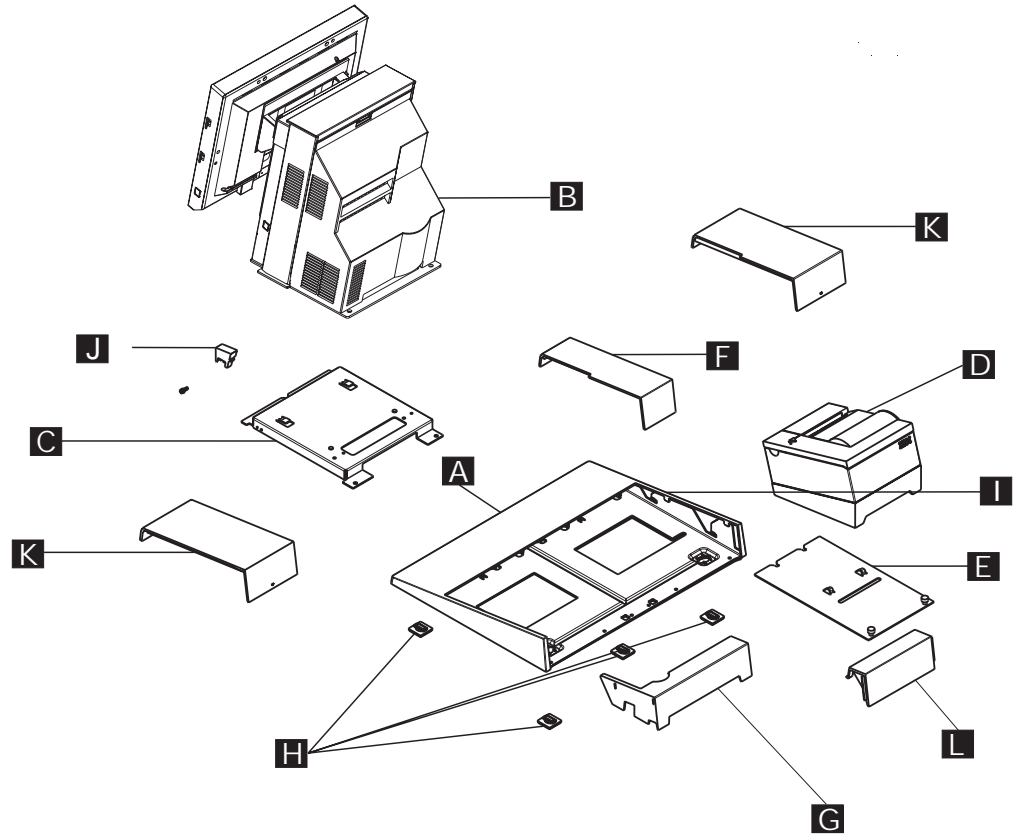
Overview of integration tray, SurePOS 500, printer, and filler panels
